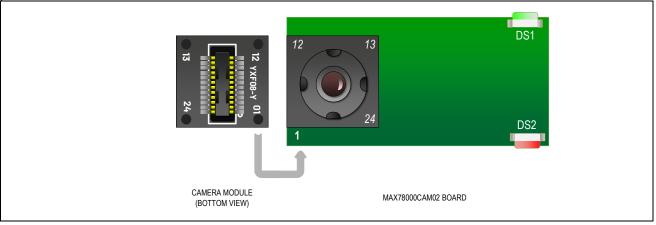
MAX78000CAM02 Board and Camera Module Alignment
